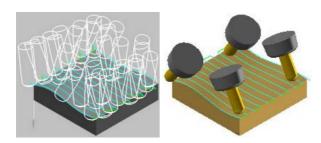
Tool axis variation along the tool path (NX CAM) [19].
